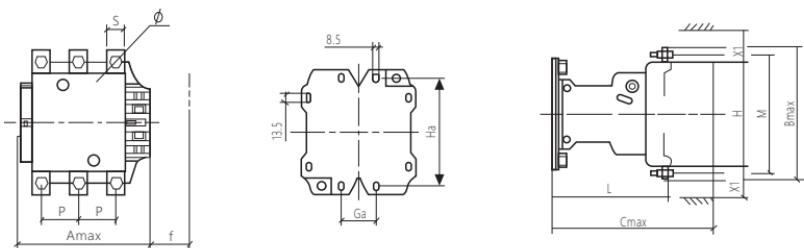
Outline and installation dimensions of NC2-400~500 AC contactors
